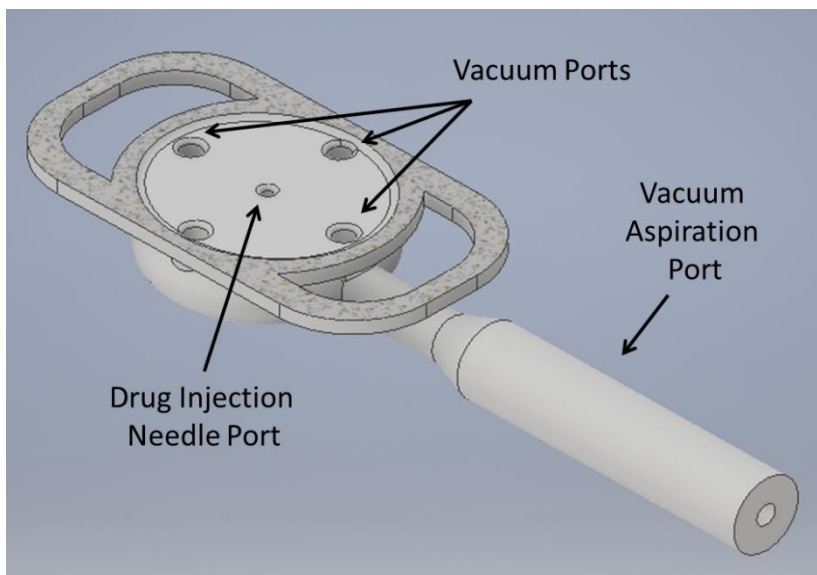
CAD design of a capsule compatible with the BIN (cross-section).
